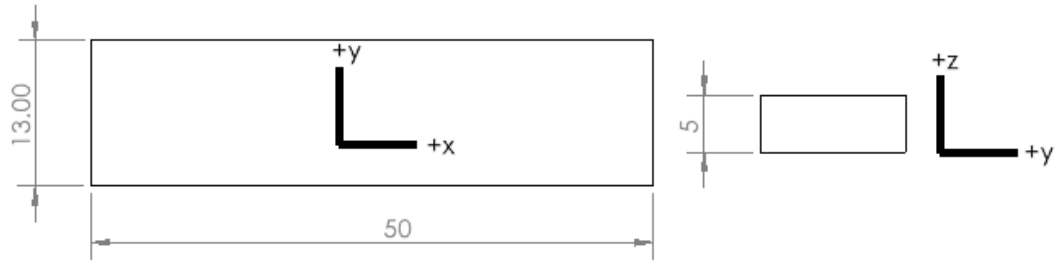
Gage-length Specimen Dimensions (mm and degrees)
